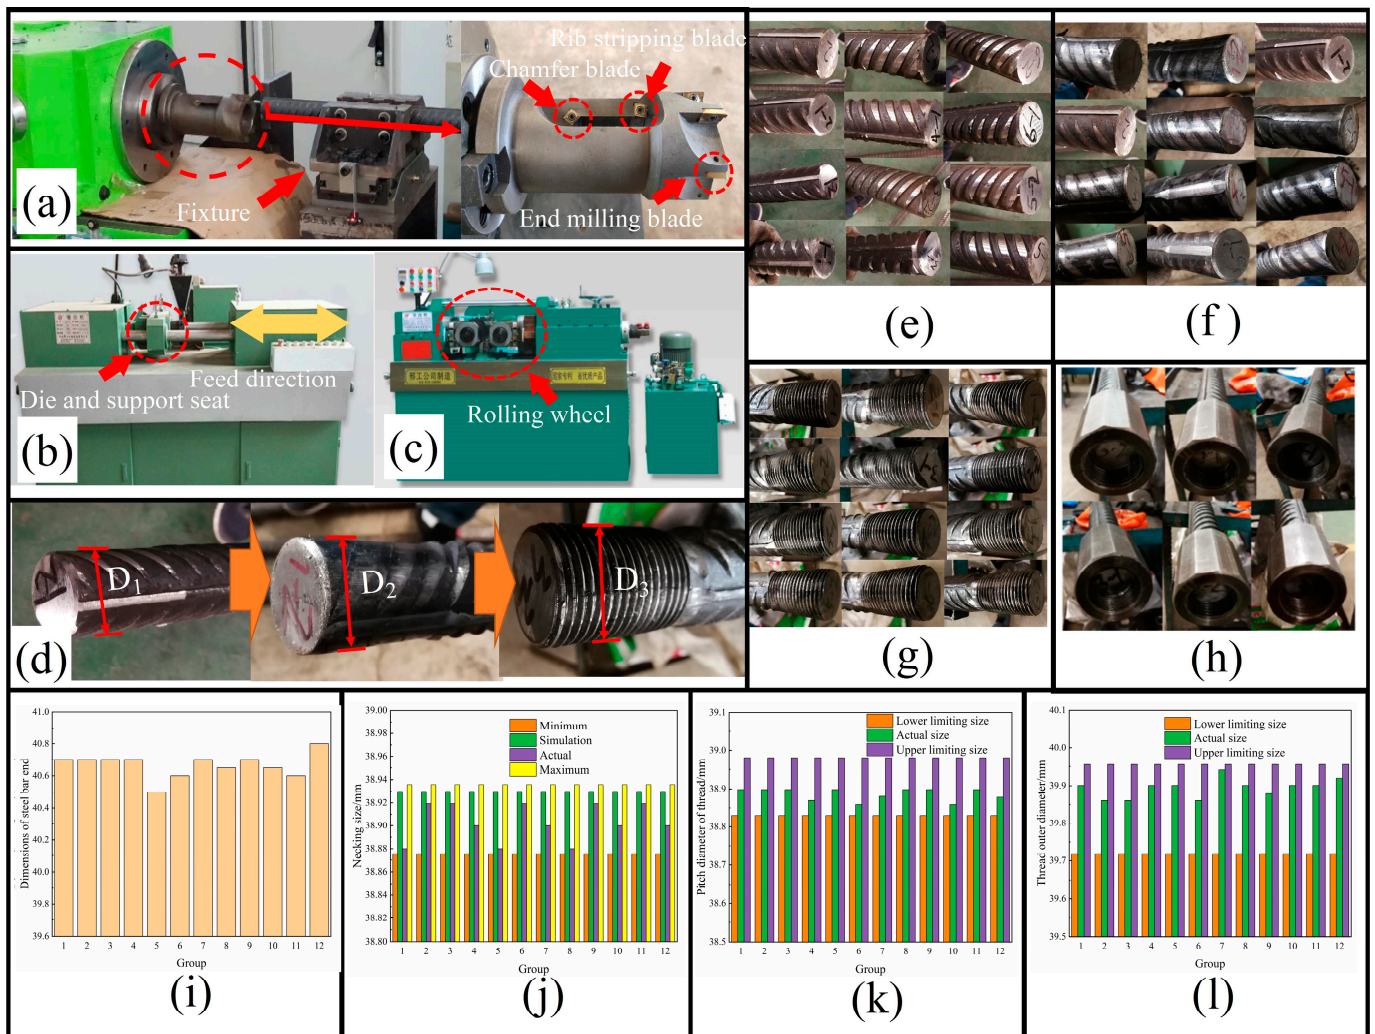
Experimental process. (a) Rib stripping and chamfering equipment. (b) Necking formation machine. (c) Thread rolling machine. (d) Diameter to be measured. (D_1 —Dimensions of steel bar end after stripping ribs. D_2 —Dimensions changes after necking formation. D_3 —Thread outer diameter after rolling.) (e) Experimental results of workpieces by composite cutting tool. (f) Experimental results of workpieces after necking formation. (g) Experimental results of workpieces after thread rolling formation. (h) Experimental results of workpieces for screw-in test. (i) Dimensions of steel bar end after stripping ribs. (j) Dimension changes after necking formation. (k) Changes of pitch diameter of rolled thread. (l) Changes of thread outer diameter after rolling.
